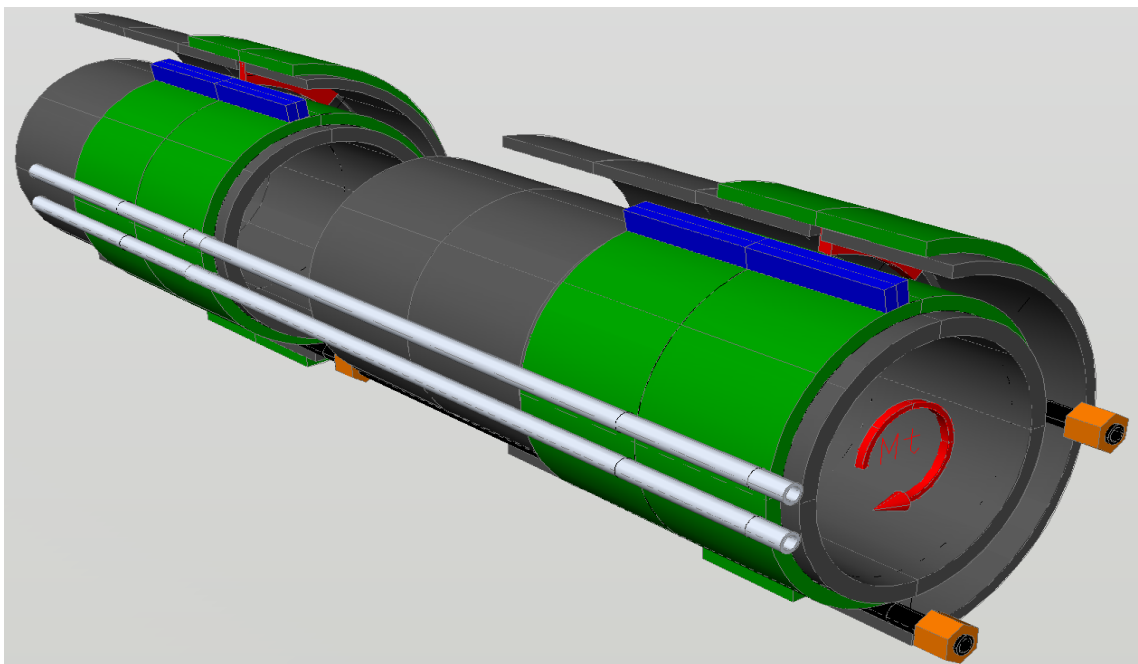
The 3D draft represents the positions of the first and last casing couplings paired together, forming the torque locking mechanism. The narrow clearance leaves only enough space for the maximum allowable hydraulic tube body to pass between couplings. Consequently the influx tube connectors have to reside before the restriction. The chosen alignment of the tubes are offset by 90 degrees, being behind the torque bushing (blue), in order to eliminate the risk of pinching any conduits as the inner string rotates onto the radial welded steel plate (red) on the outer coupling for its final positioning after the casing run.
